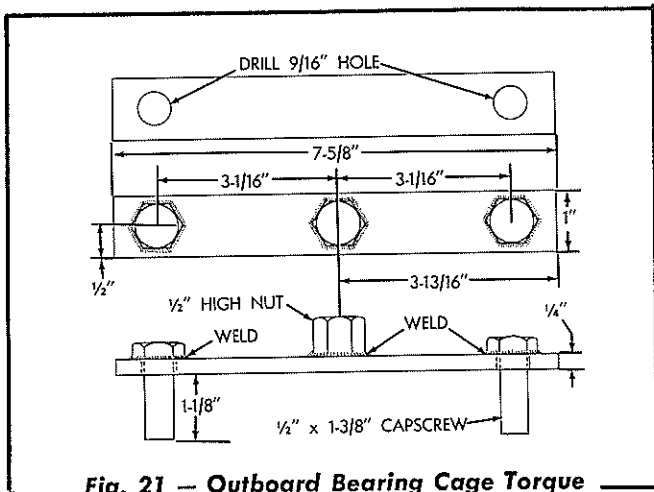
Outboard Bearing Cage Torque Wrench Adapter
